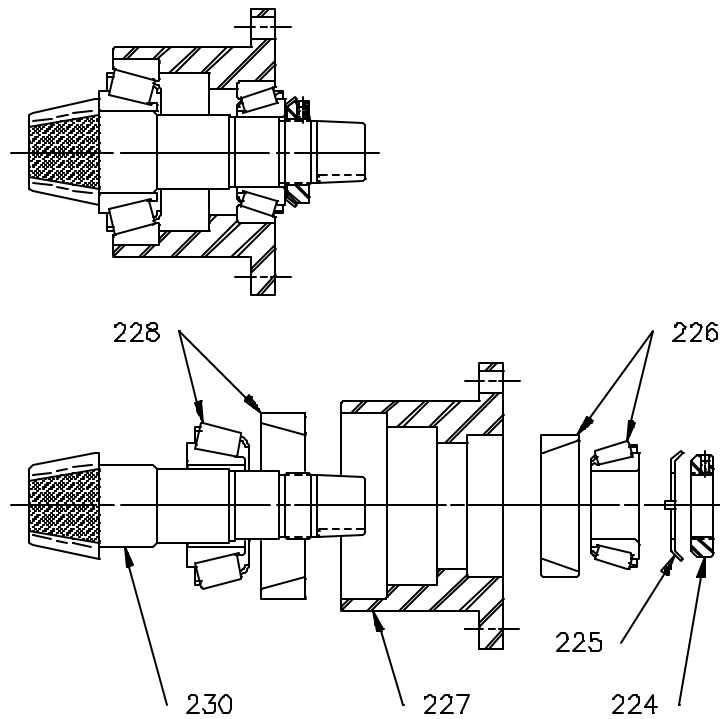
Spiral Bevel Pinion Cartridge Assembly [223]
